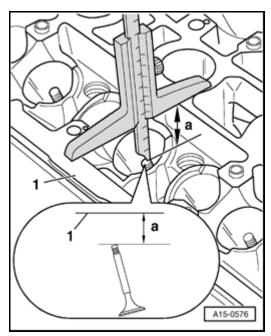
Measuring Distance Between Valve Stem End (Upper Edge) And Top Surface Of Cylinder Head Using Depth Gauge
